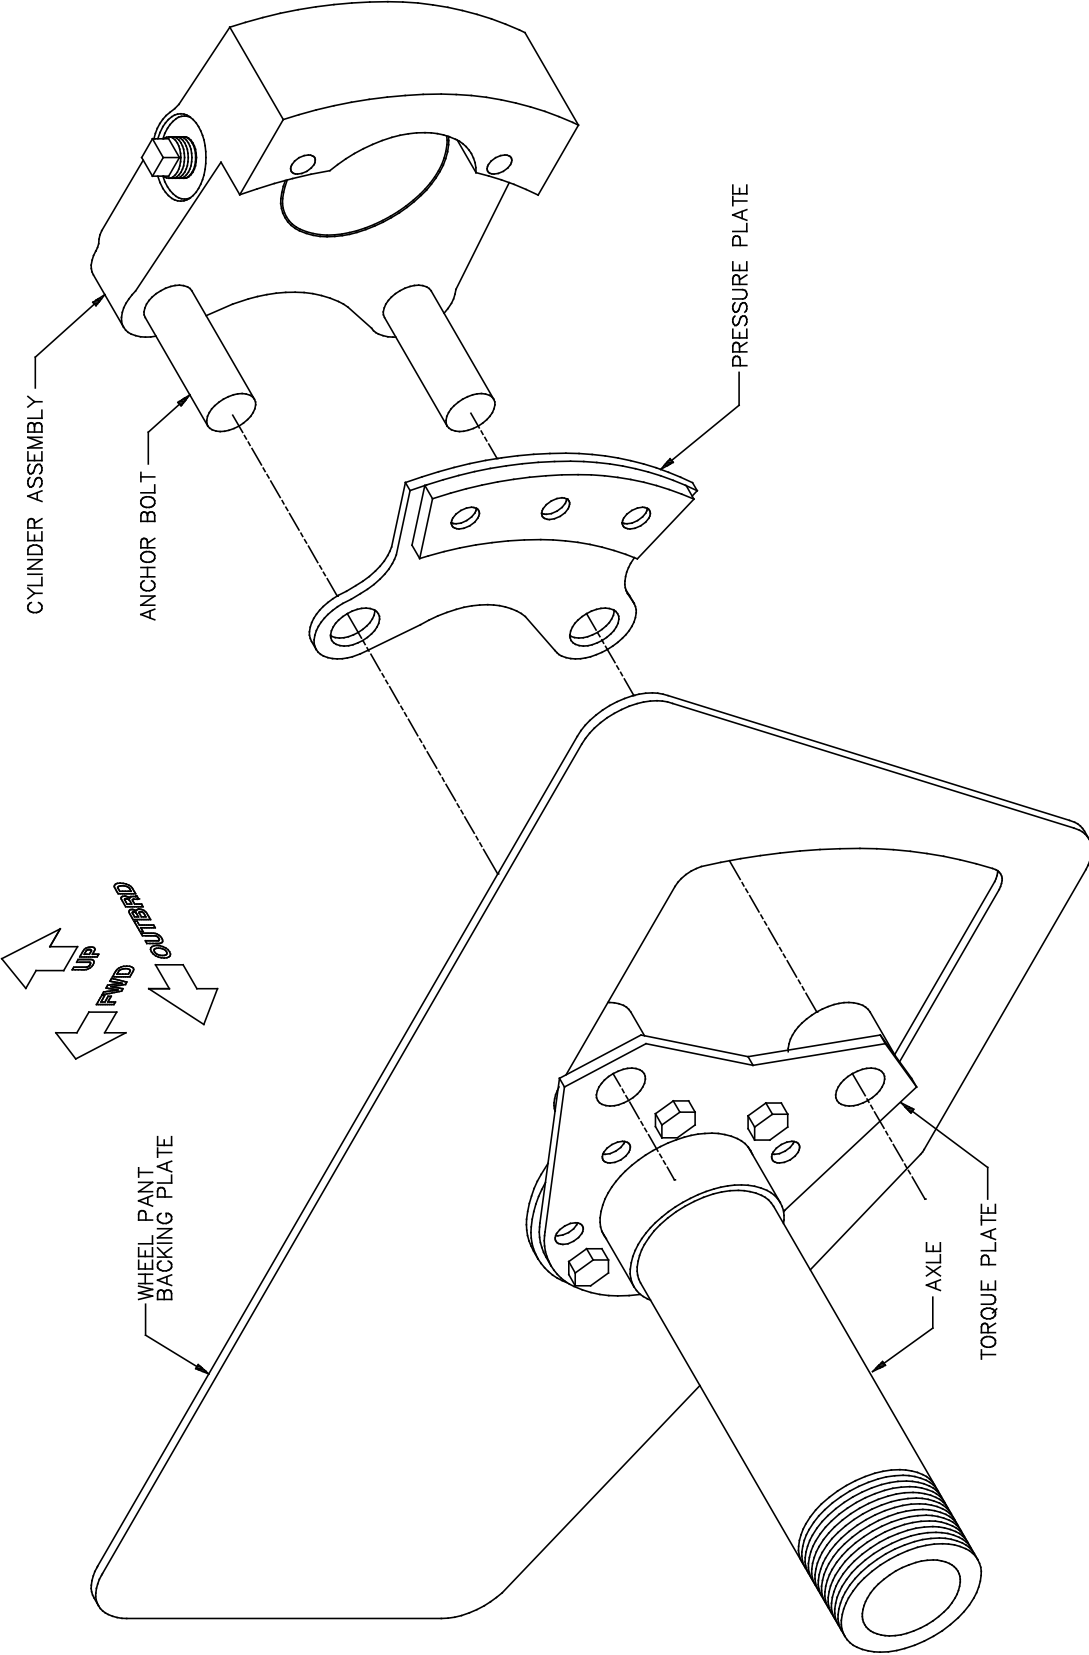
Fitting the Wheel Pant Backing Plate to Clear the Brake Calliper Assembly
